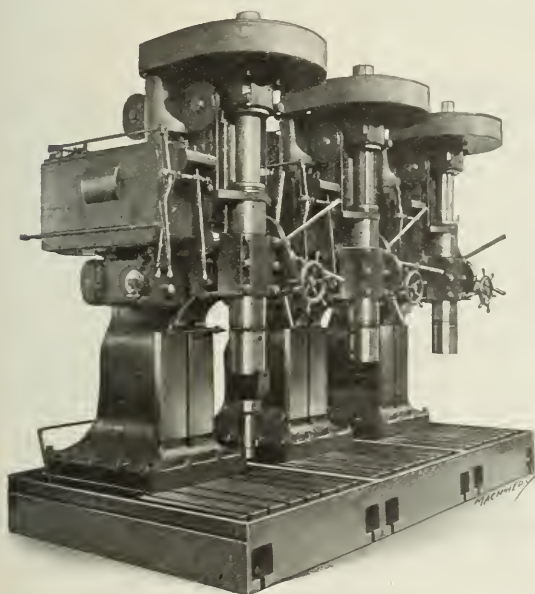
Left-hand Side of Baker Drilling Machine, showing Speed- and Feed-boxes and Control Levers
